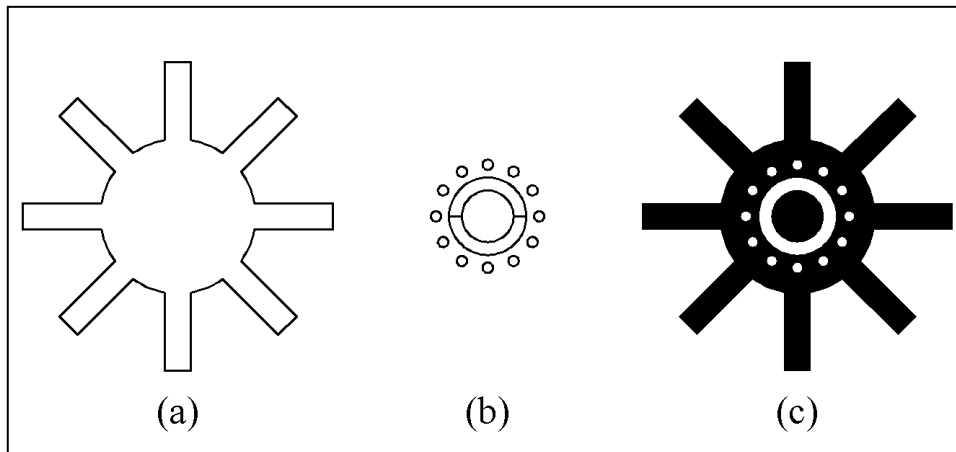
Defining the mask layout for the idler gear using positive and negative mask sets.
